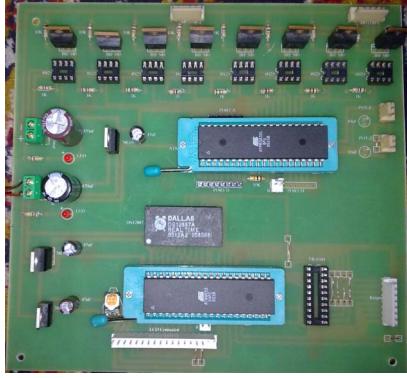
Designed PCB for Control of Heliostat Power Production System
